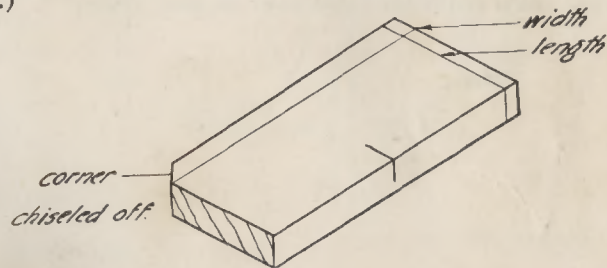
Squaring board to dimensions. Steps 4 and 5
